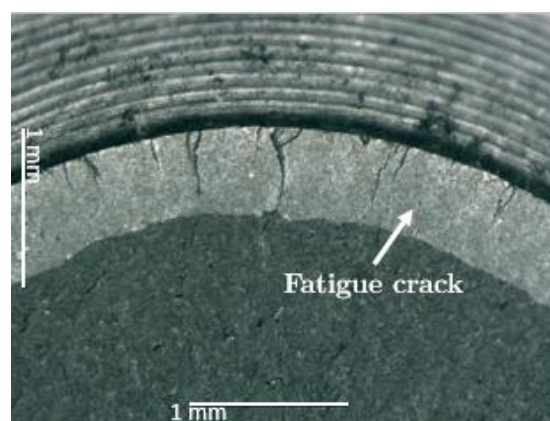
Fracture surface of the test specimen with indicated fatigue crack (bright ring).
